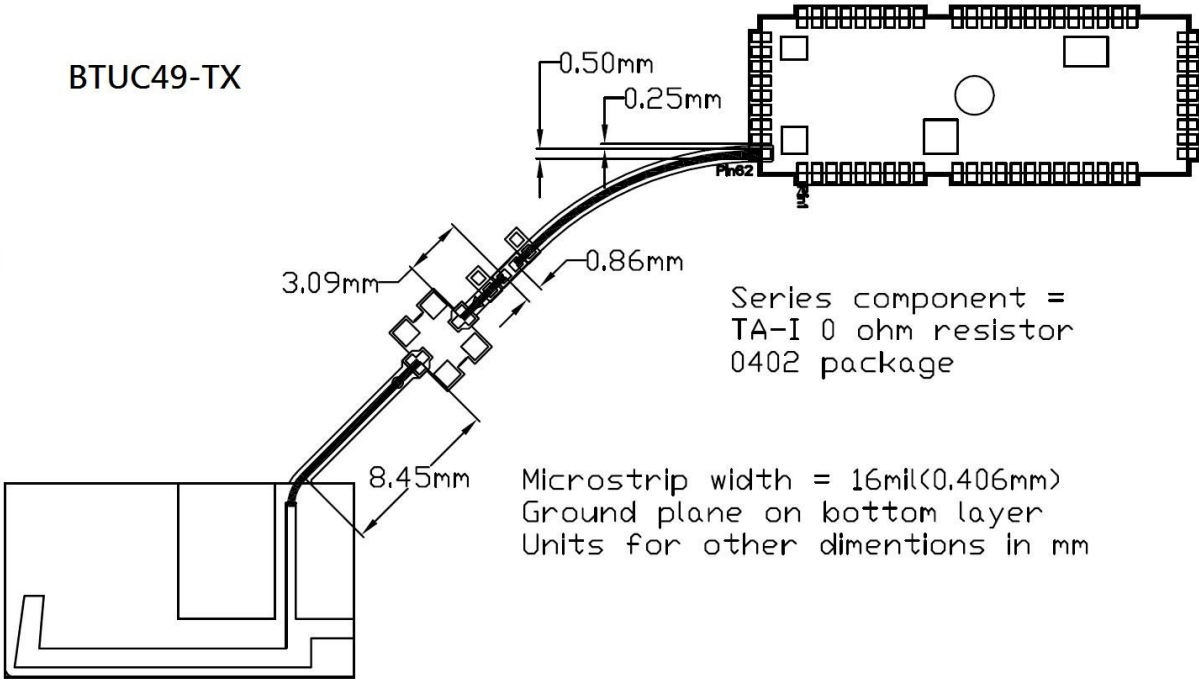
Trace Dimensions and RF Matching Component Placement for BTU49-TX
